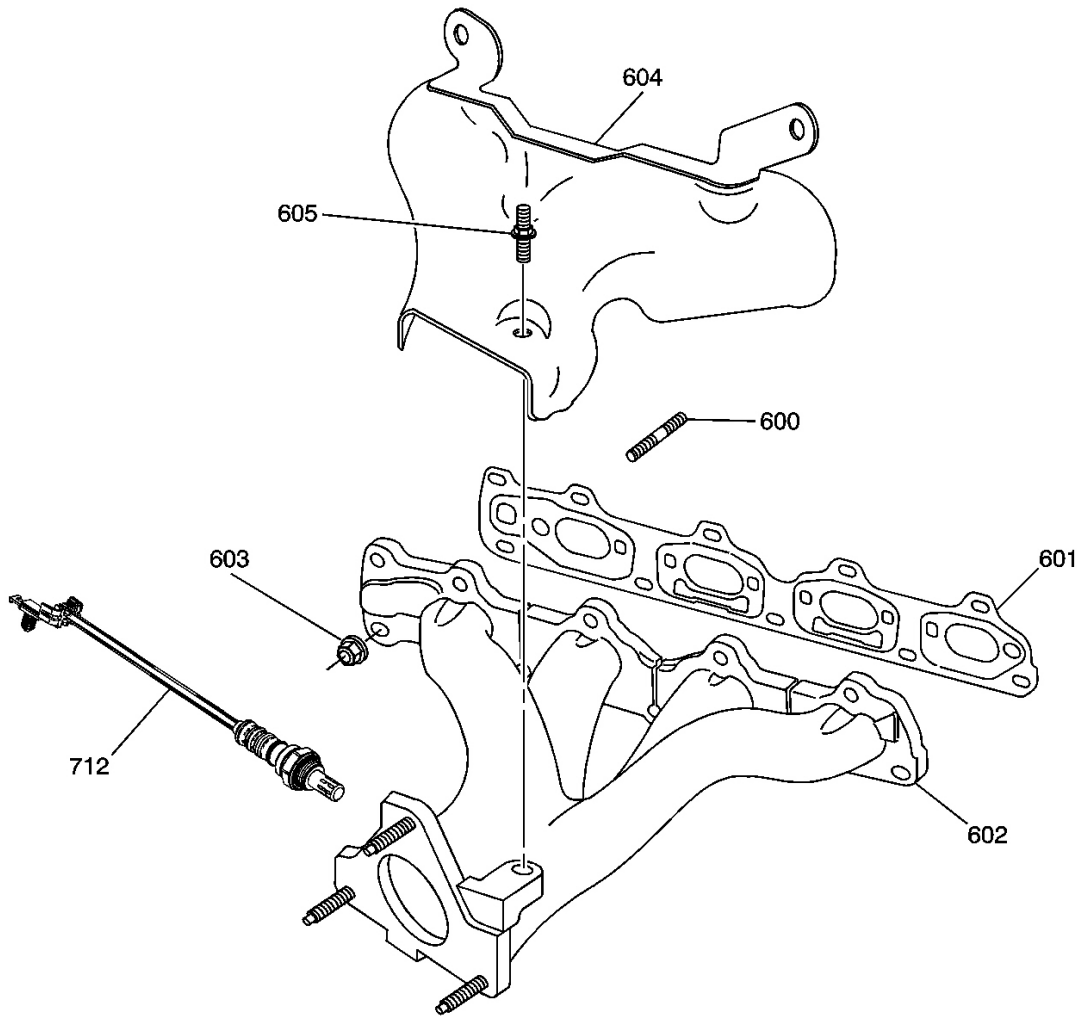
Disassembled View Of Exhaust Manifold and Components
